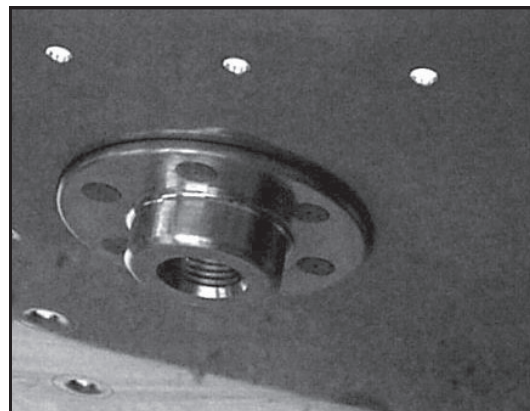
The VA-112 drain flange riveted to the outside of the tank skin.
